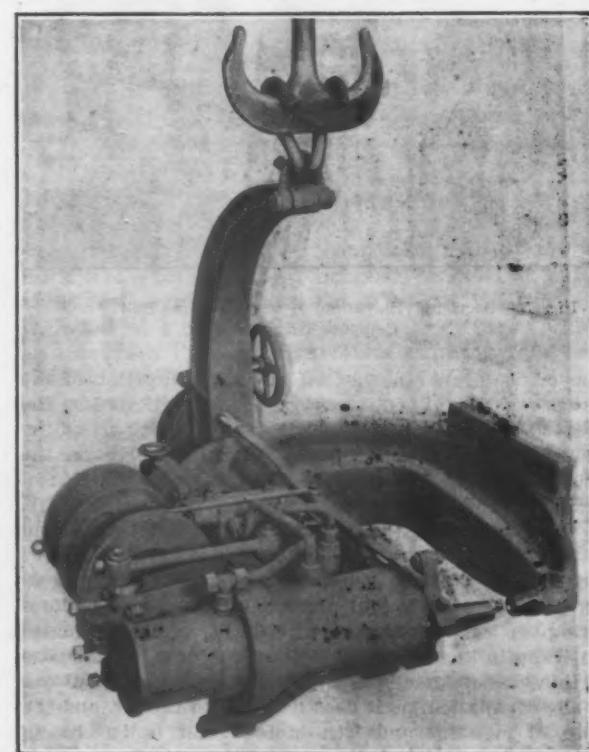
The Riveter Suspended to Rivet a Vertical Seam.
